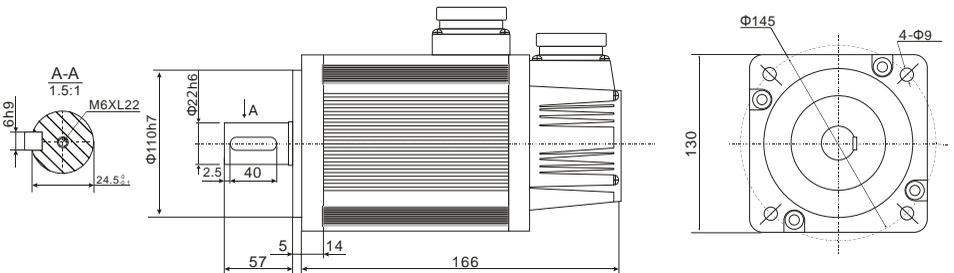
1KW (Middle inertia) type Motor installation dimension (Unit: mm)
